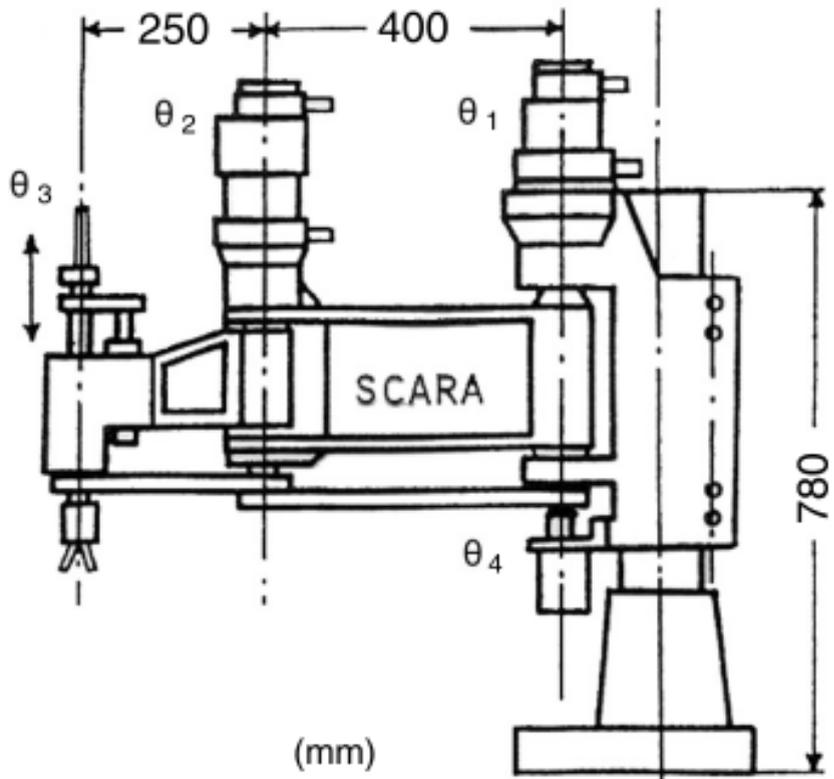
Configuration and dimensions of SCARA Prototype II [6].
